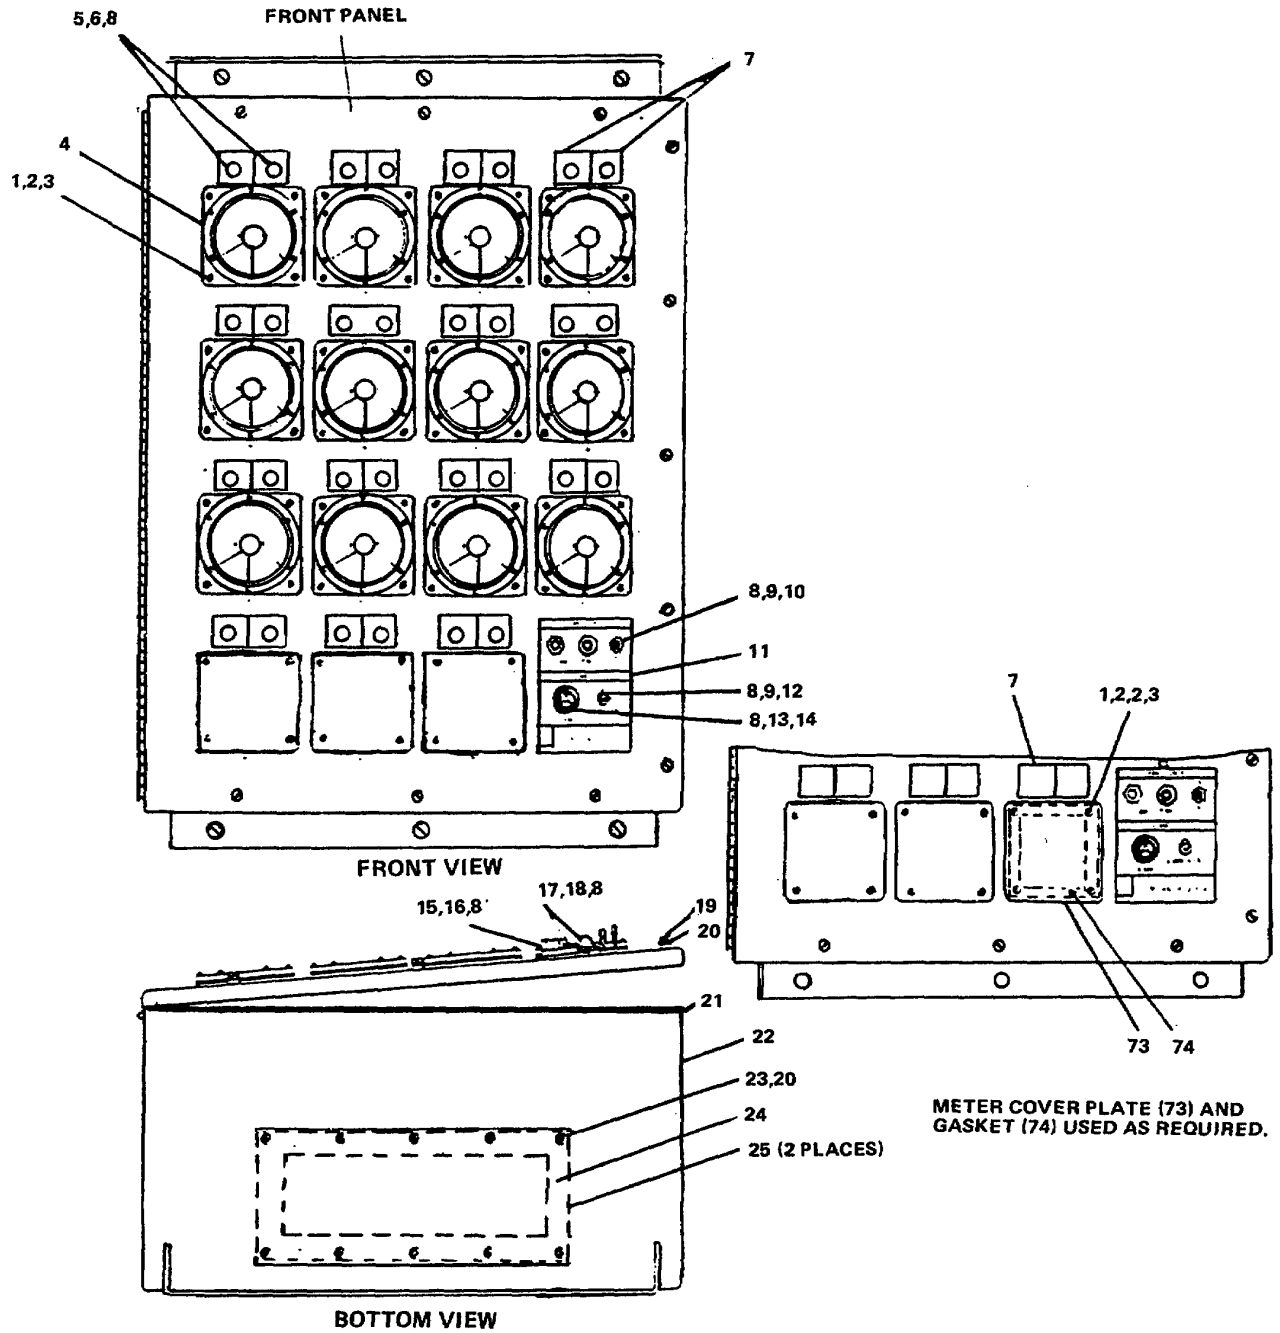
Receiver Module, RE-39260-12/MI-M8-38100/M9-M12-38139
